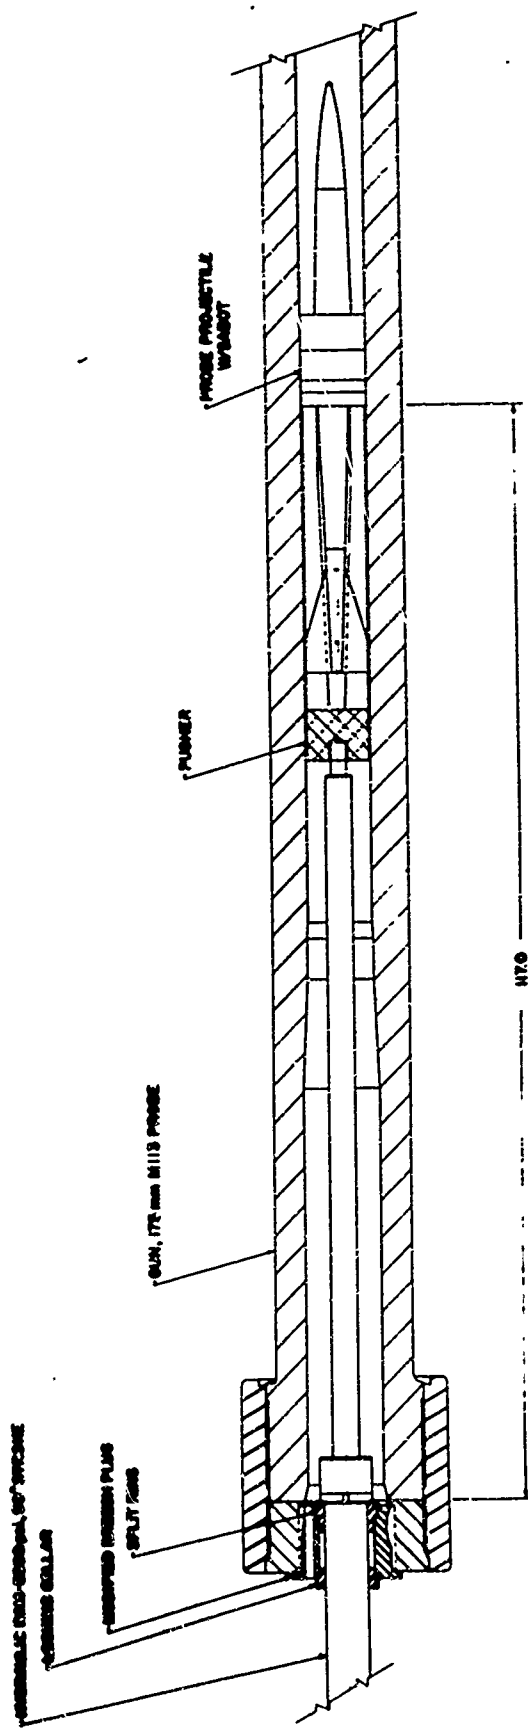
PROBE PROJECTILE LOADING MECHANISM
